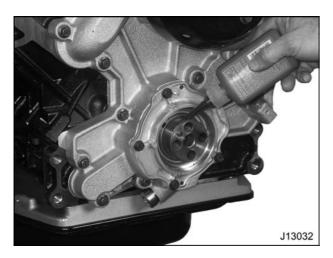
Adding Loctite® Hydraulic Sealant to crankshaft
